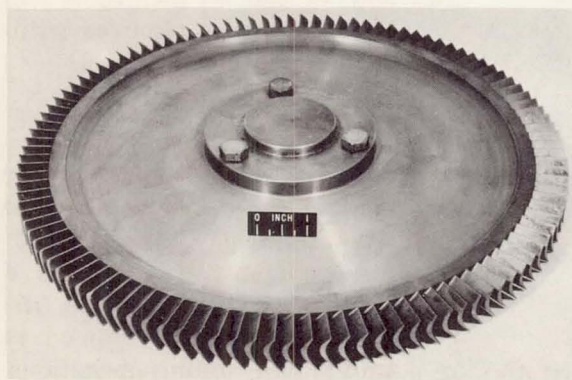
Molybdenum turbine wheel. Electric-discharge machining.
